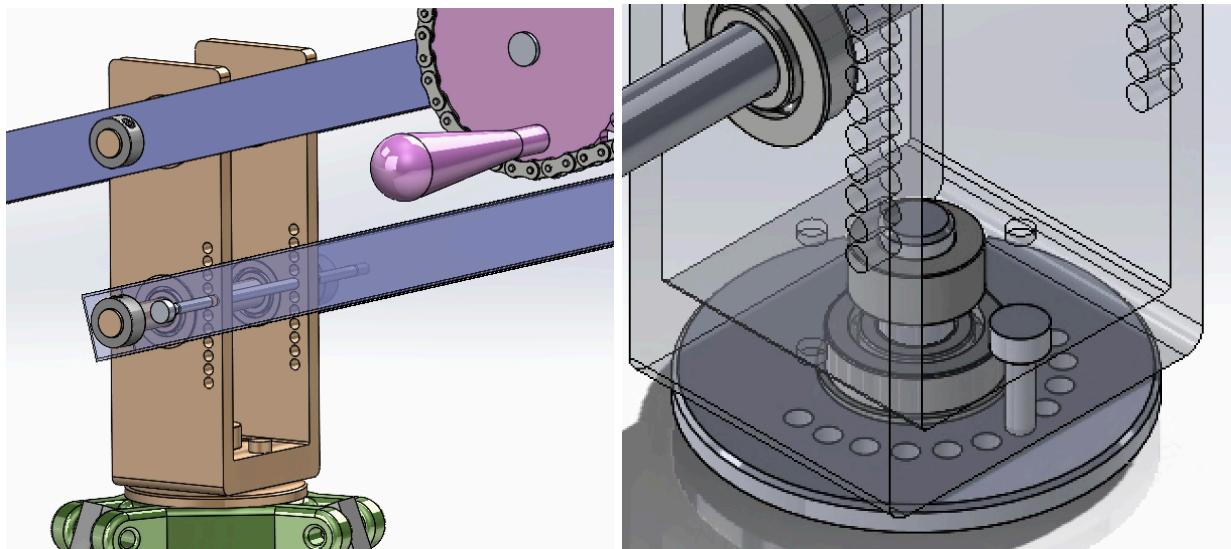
C.4. Locking Mechanisms. Y-locking shown on the left consists of a horizontal pin.
